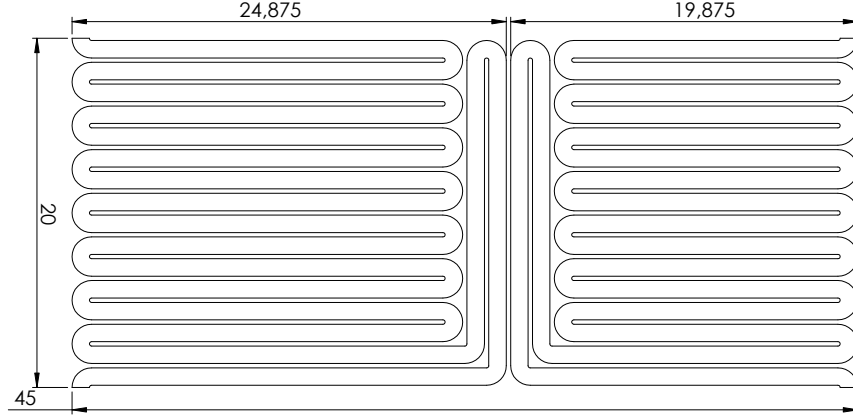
The CAD drawing of Cr serpentine heater (unit: mm)
